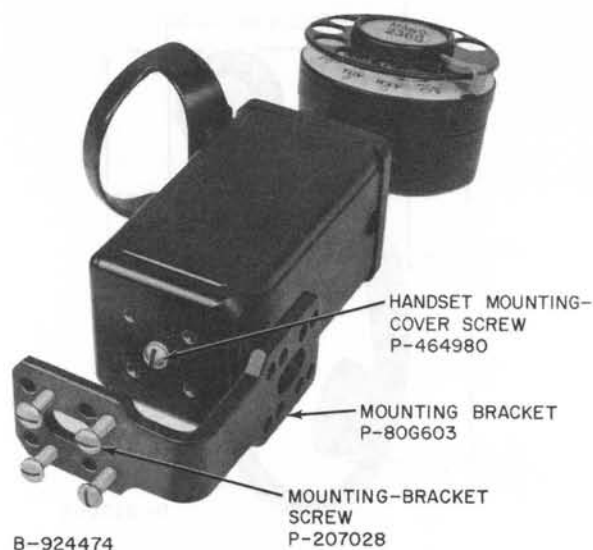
Assembly of G-Type Handset Mounting and Bracket
